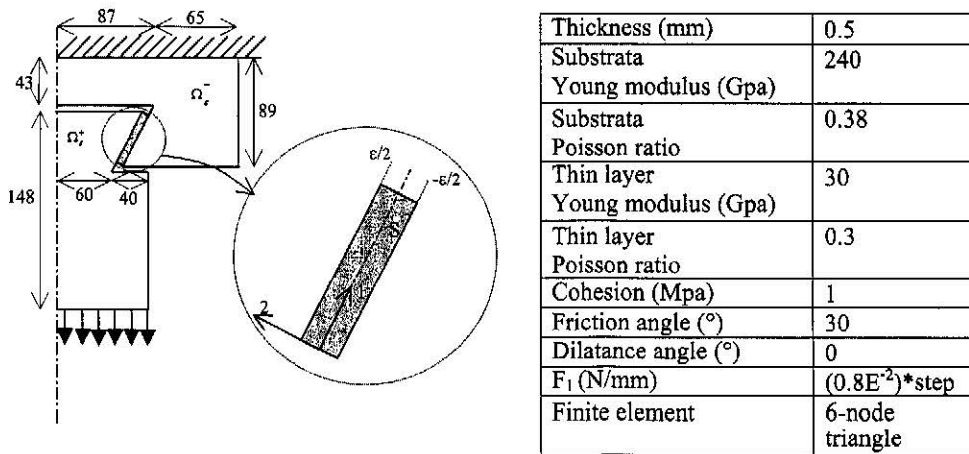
The third example: a dovetail assembly (the dimensions are in mm)
